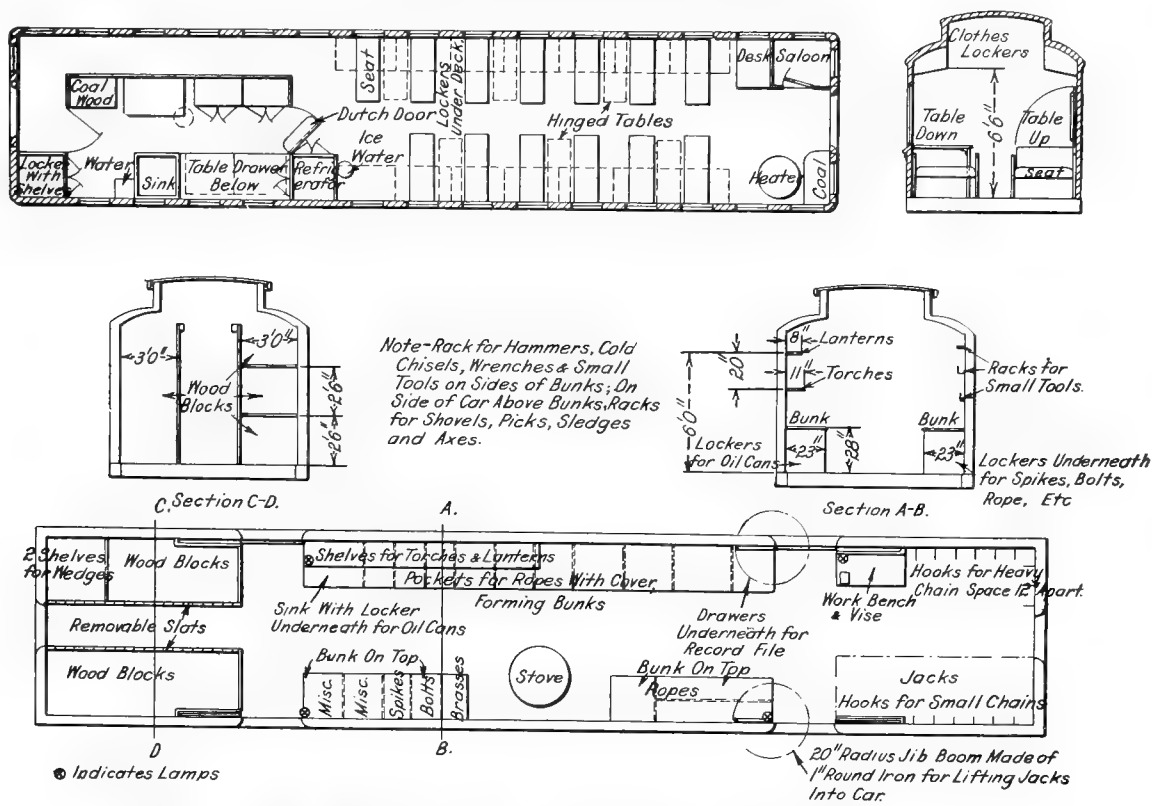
New York, New Haven & Hartford Dining, Tool and Sleeping Cars.
